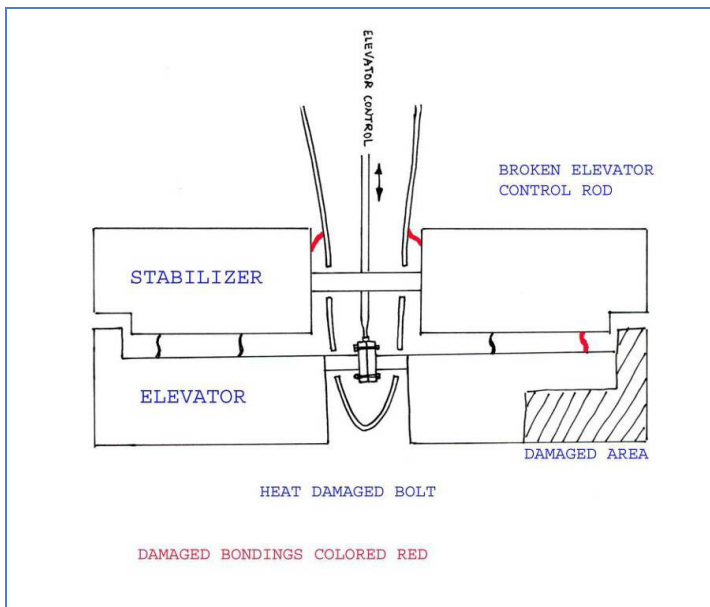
Lightning protection bond wires in the horizontal stabilizer
